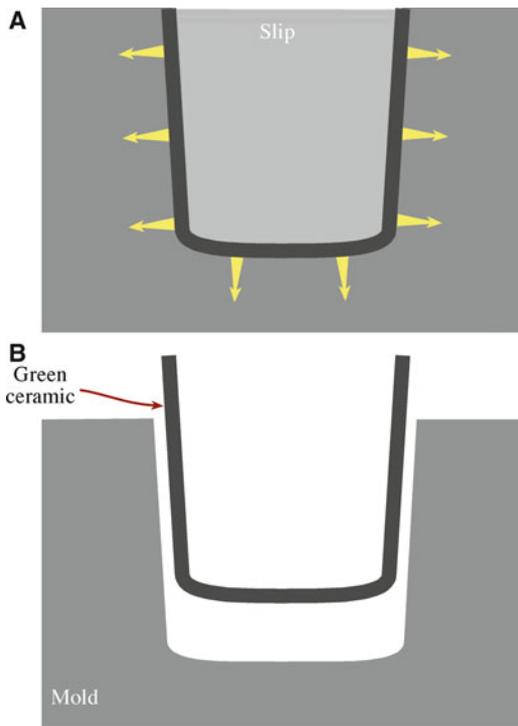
Drain-casting process. (A) Fill mold with slip. Mold extracts liquid, forming compact along the mold's walls. (B) After excess slip is drained, the dried green ceramic is removed.
